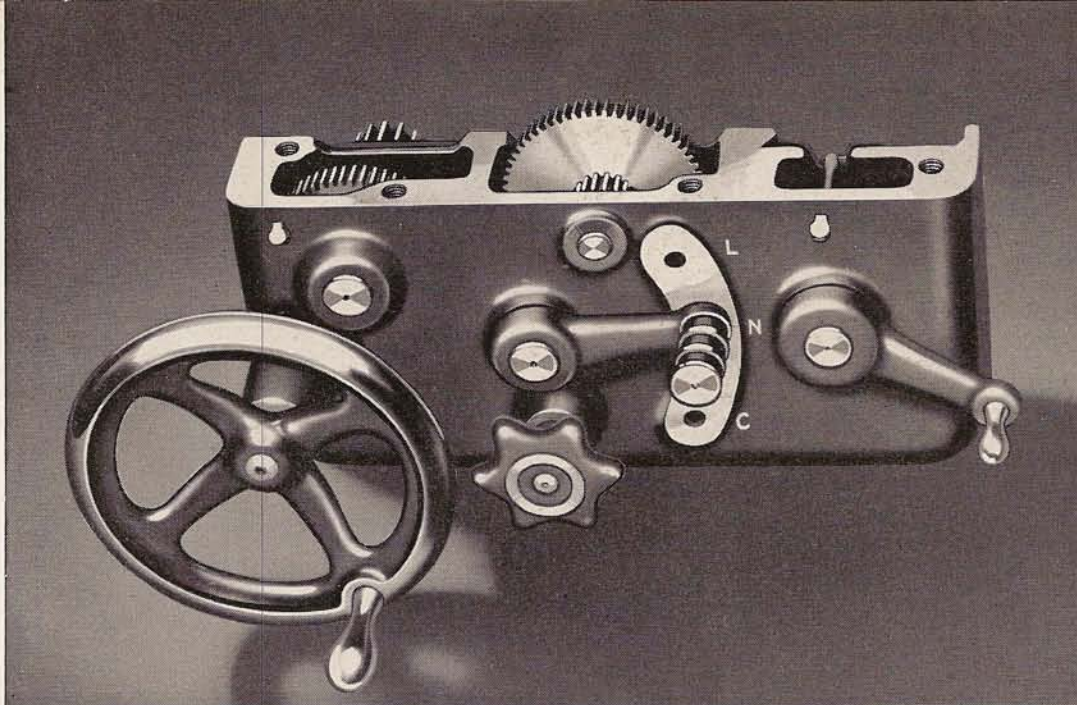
Front View of Double Wall Apron Showing Rigid Box Type Construction
